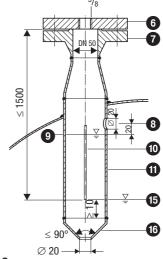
Protection tube (provided on site) for installation inside the boiler
